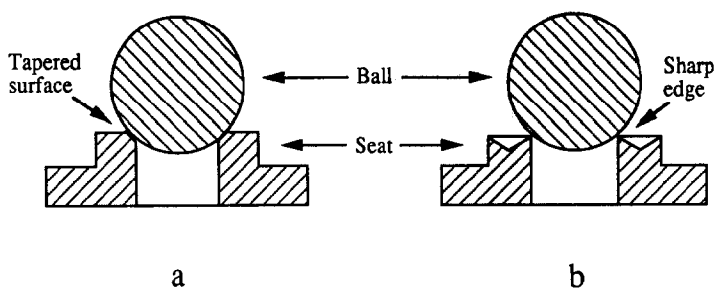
Enlarged ball check sealing designs: (a) conventional (tapered seat), and (b) modified (sharp-edged seat).
